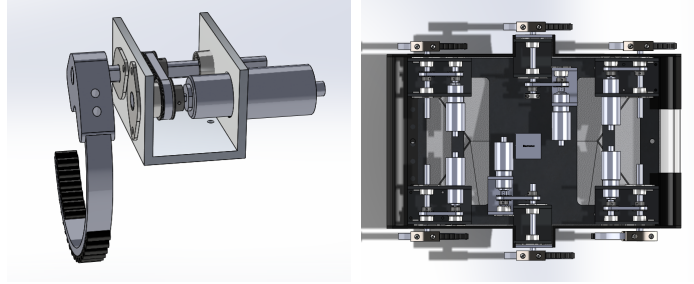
Left: Figure of the motor mount assembly. Right: Internal frame
